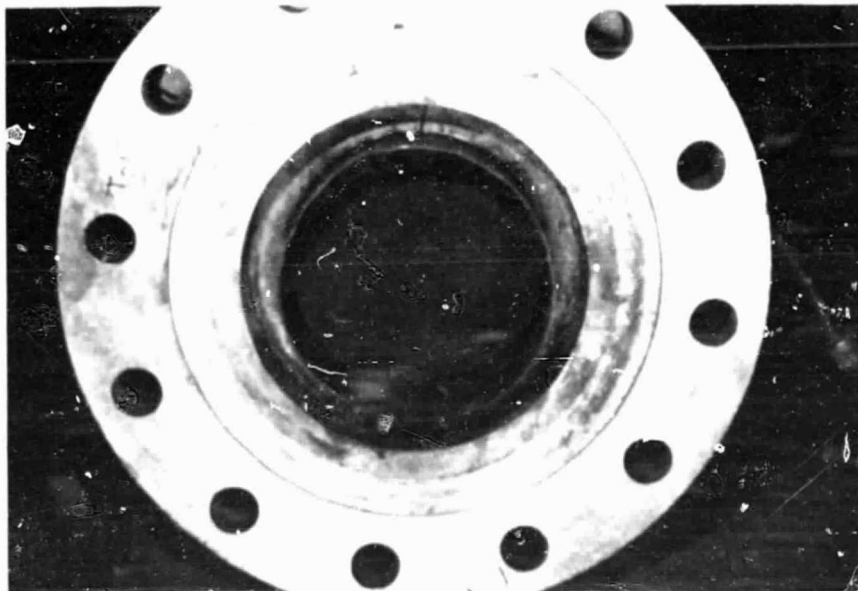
Damaged Element 3 - Photograph - Post-Medium-Heating-
